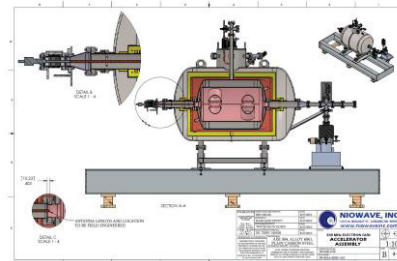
Mechanical design of the whole cryomodule assembly ready for the crytest.
